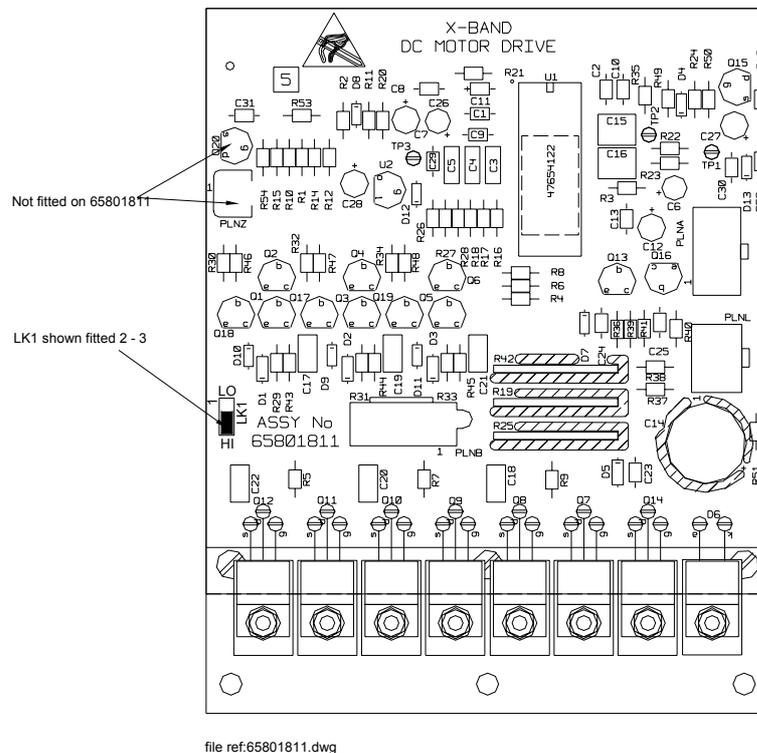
Motor Drive Board 65801811 – Showing Link Position
